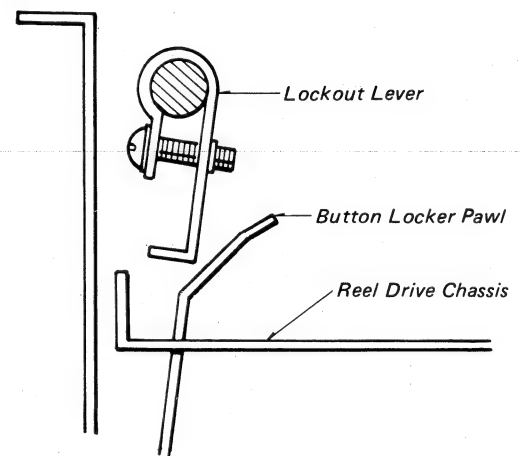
Positional Relationship between Lockout Lever and Button Locker Pawl.
